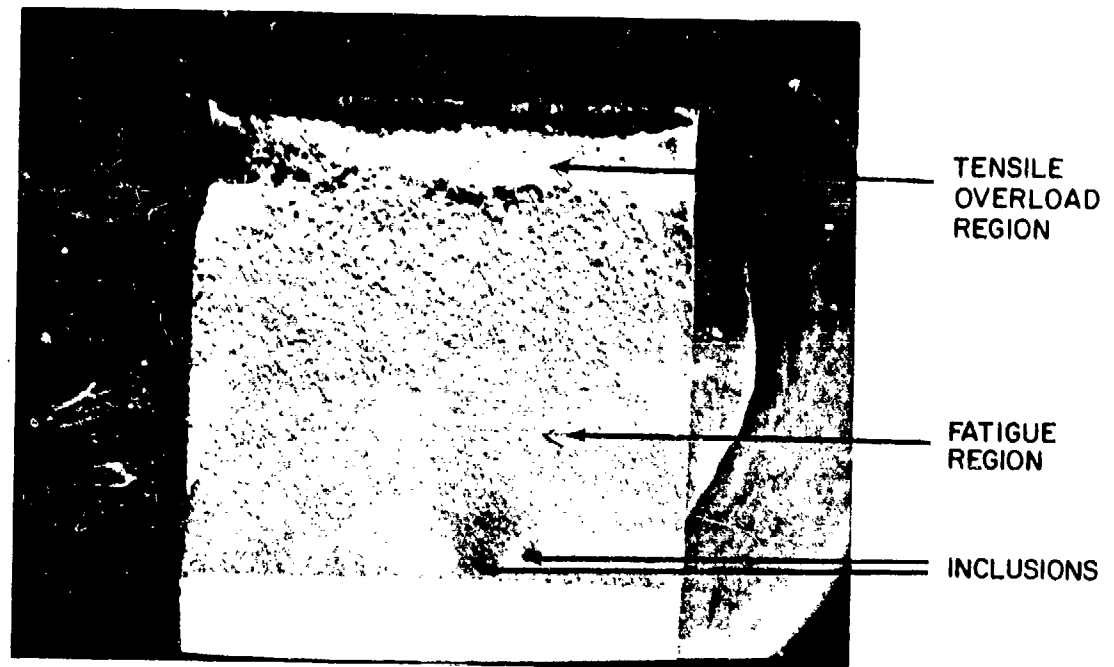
Fatigue fracture surface of A-607 steel, 12x.
